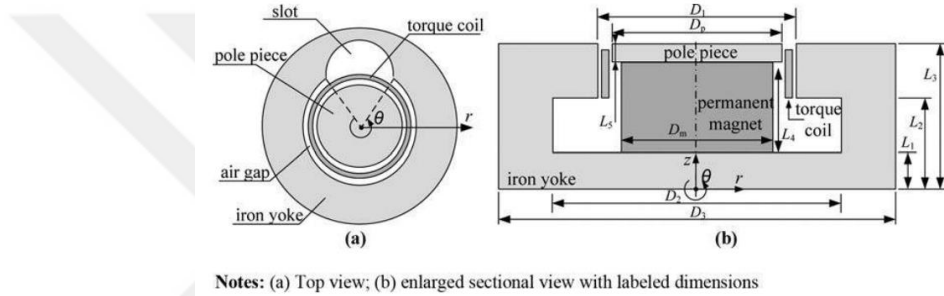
Top and Cross-Sectional View of Magnetic Feedback Torquer [46]
